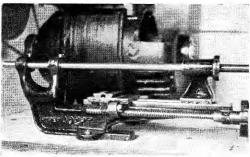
Aligning the tailstock by means of a bar passed through the mandrel bearings and tailstock casting
